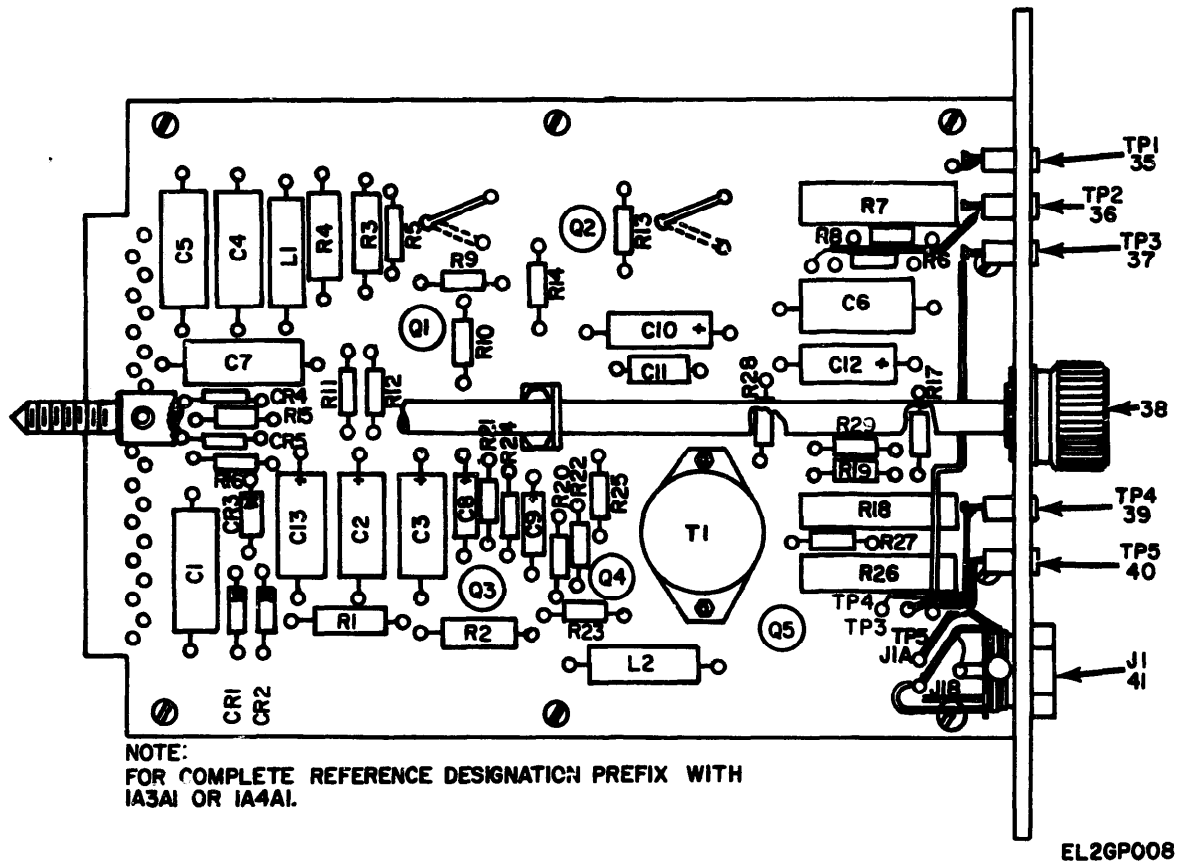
Send Module Assembly 1A3, Telegraph Send Subassembly 1A3A1.
